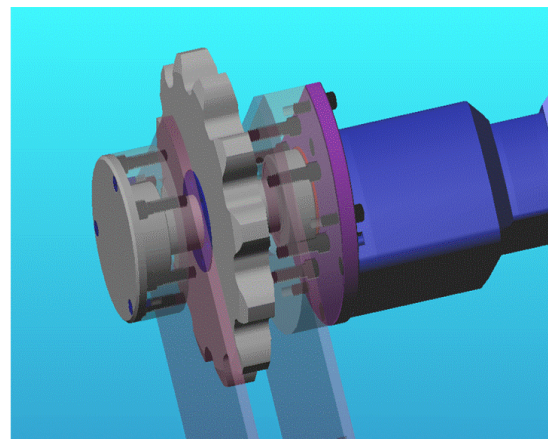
Modular Motor Mount and Rear Drive Sprocket
